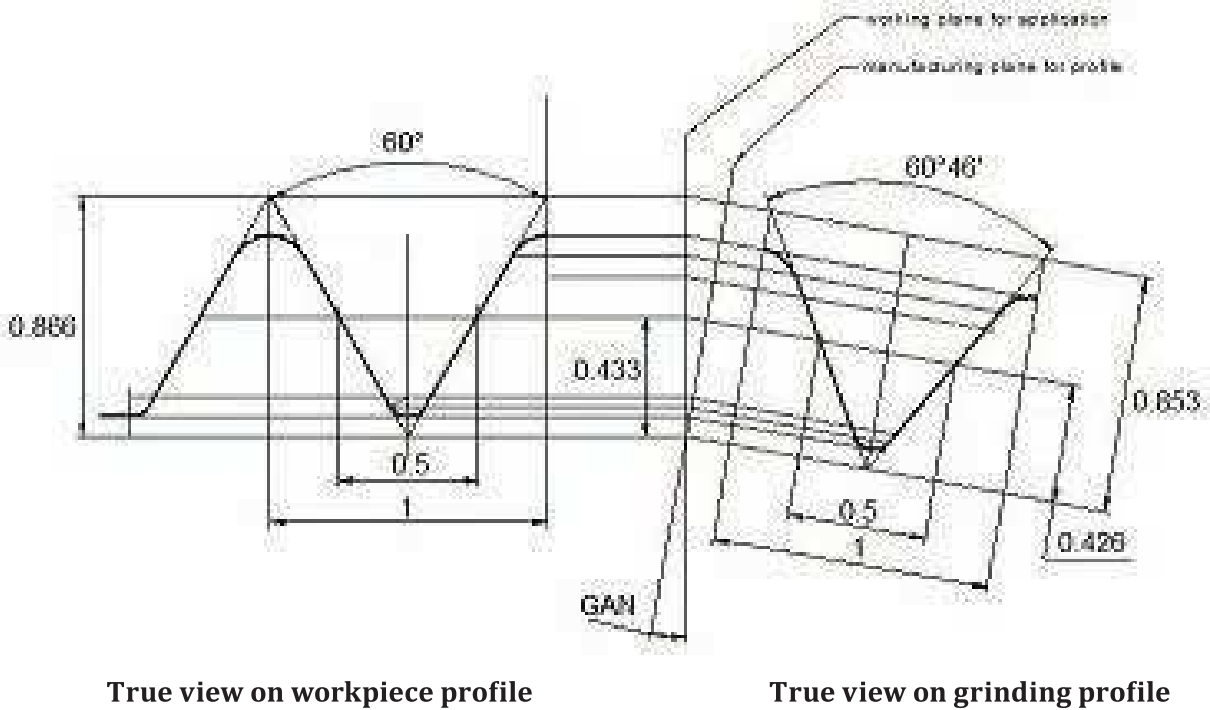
Profile design of metric thread — working view vs. manufacturing view
